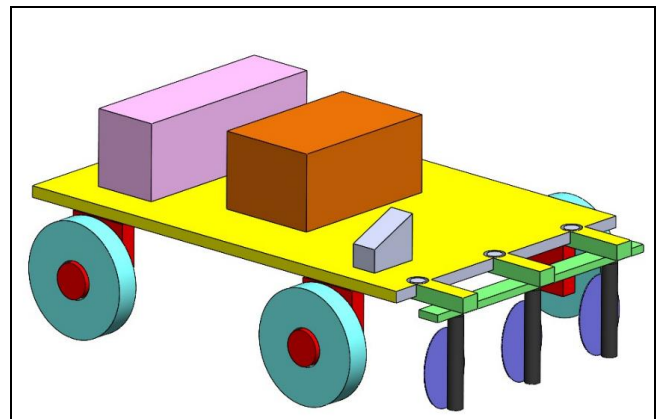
SolidWorks 3D model of the unmanned grain turning vehicle with three rear inversion tools.
